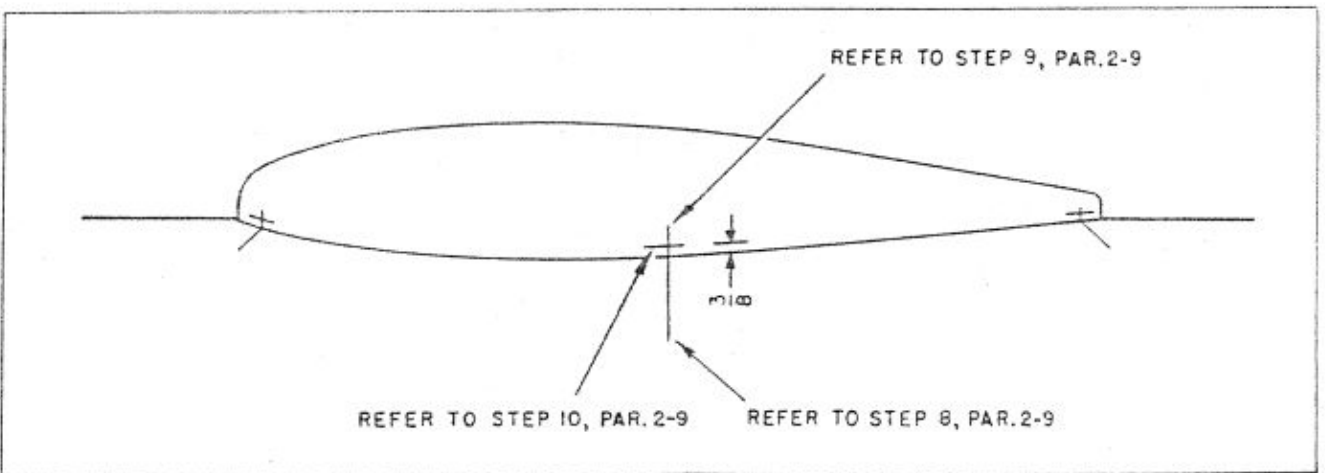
Location of Mounting Holes on Housing ARC-17764
